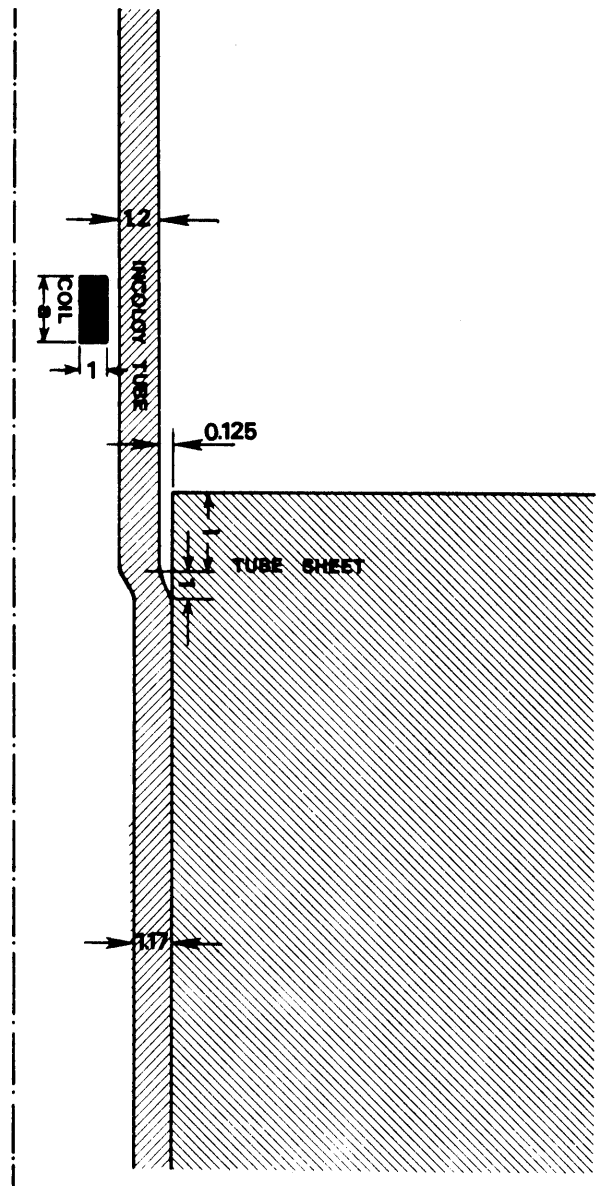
Geometry of steam generator section showing the tube sheet, tube, and coil. Dimensions are in millimeters.
